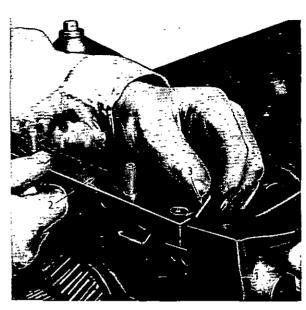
Fitting Main Bearing Bridge Piece Oil Seal.
